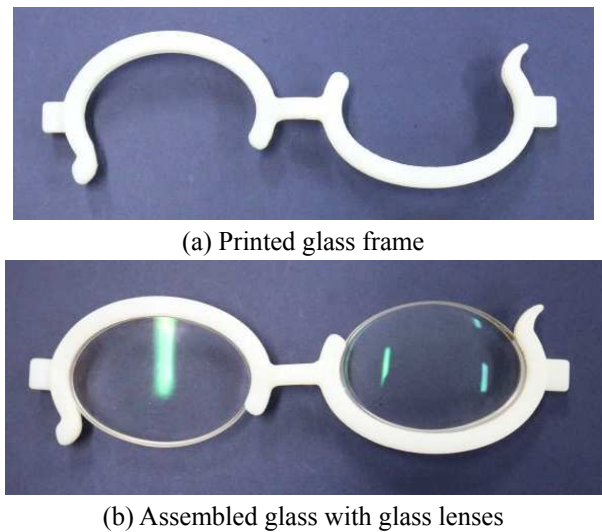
Fabrication of the snake-shaped eyeglass frame
